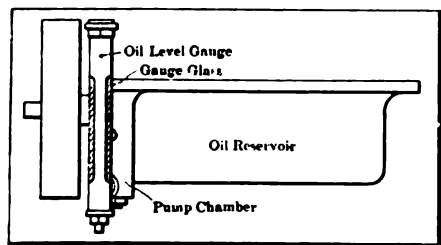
The oil reservoir of the Mercer "30 M" showing level gauge and pump chamber
